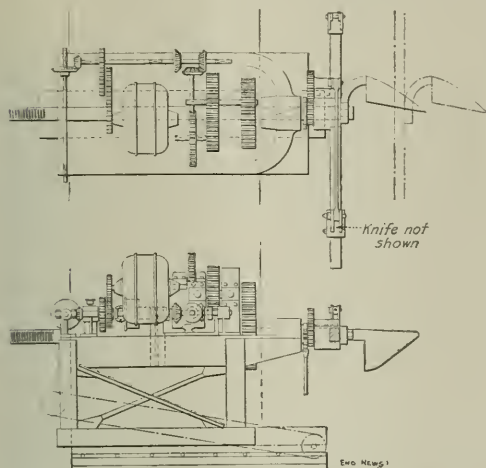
GENERAL DETAILS OF THE BONNETT TUNNELING MACHINE
